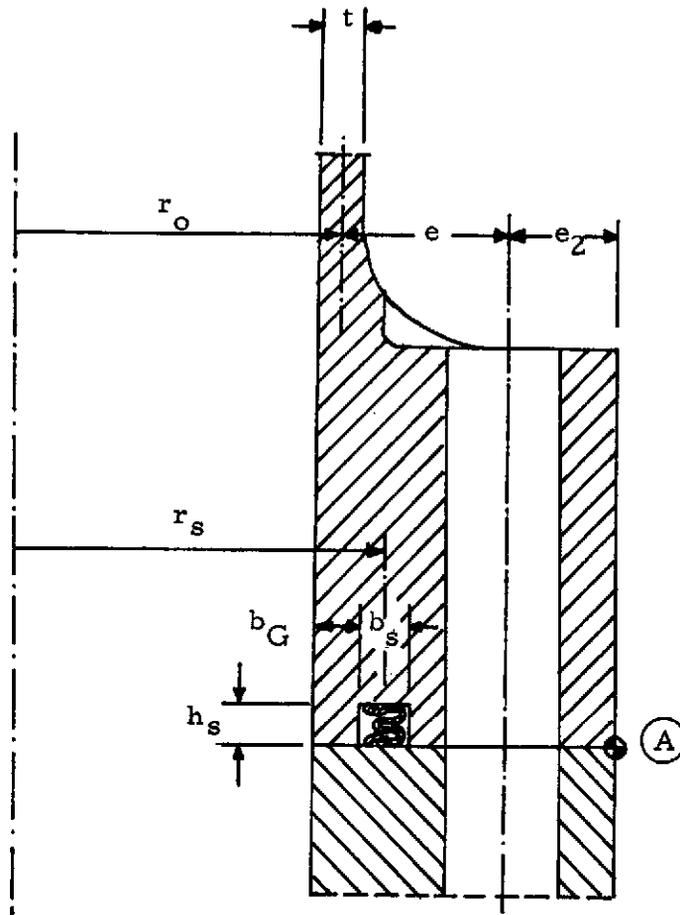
Metal-to-Metal Flange with Pressure Energized Seal
